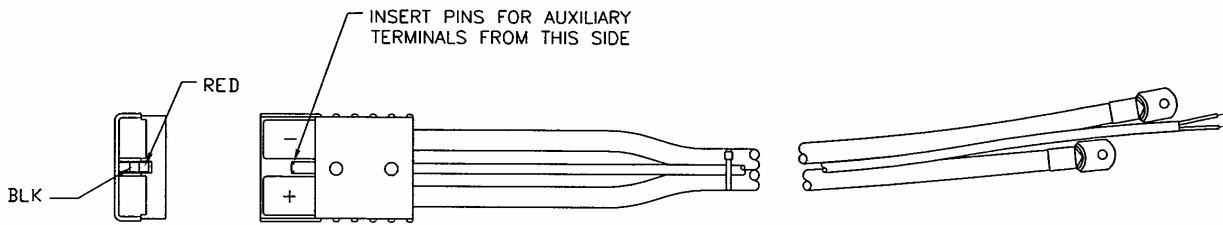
Battery Cable with Auxiliary Contact Cable Harness
